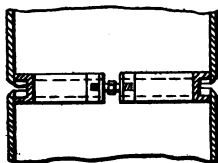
Mandrel for use in welding circumferential seams in cylindrical sections.
